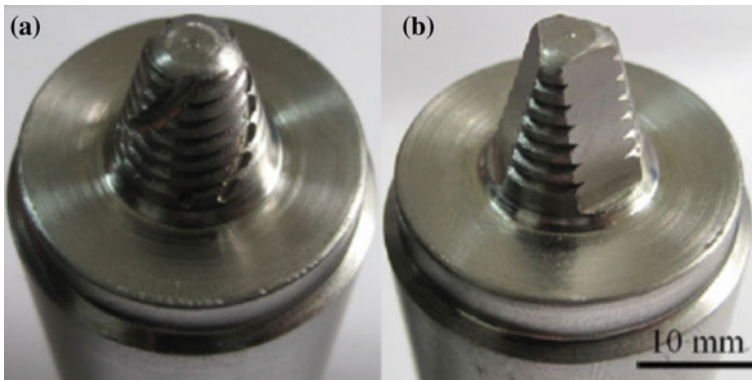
FSW pin profiles. a Threaded and tapered with three spiral flutes. b Threaded and tapered with triangle
